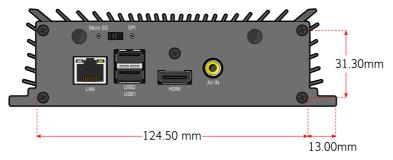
Dimensions of the VIA AMOS-820 (rear view)
